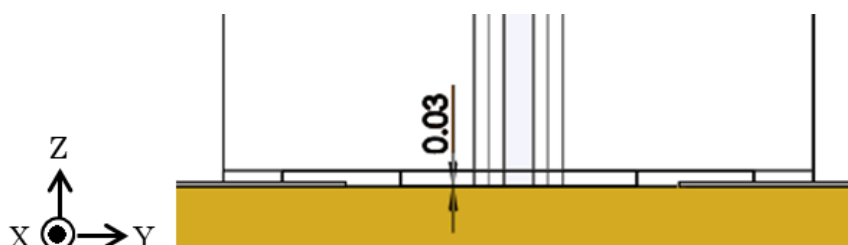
Enlarged view of part B in Fig. 2.11
